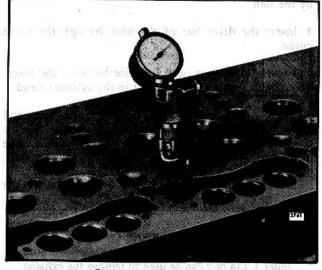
Determining Concentricity of Valve Seat Insert with Dial Indicator
